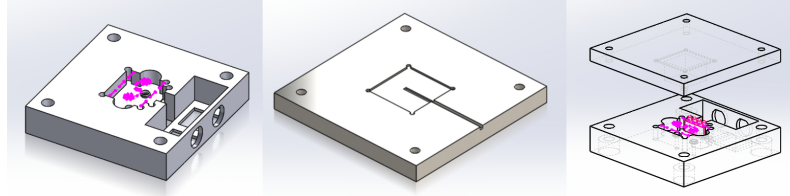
First iteration designs of top and bottom parts of sensor holder along with their assembly
